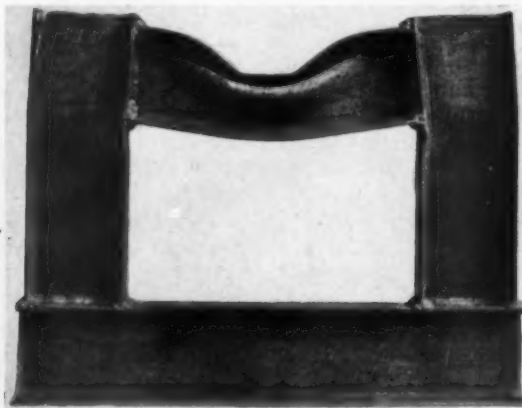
TEST PIECE FOR STATIC TEST AFTER TESTING
